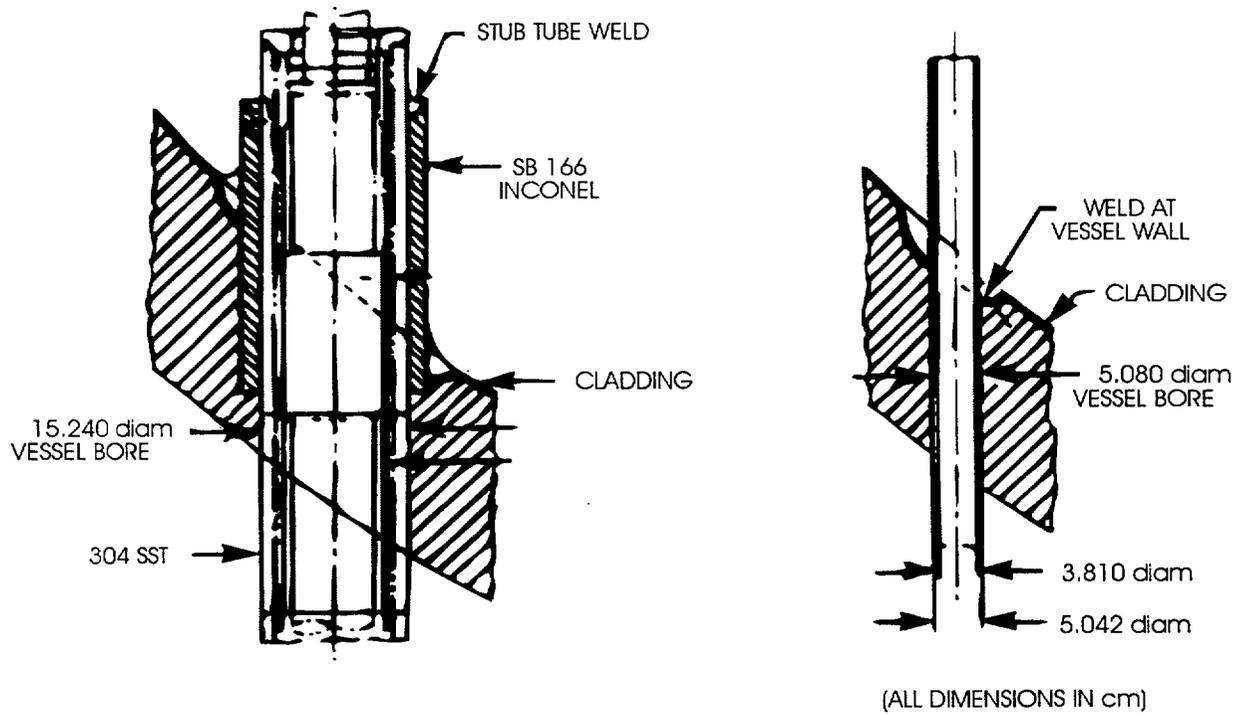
The BWR control rod drive mechanism assemblies are held in place by upper stub welds; the incore instrument tubes are supported by welds at the vessel wall.
